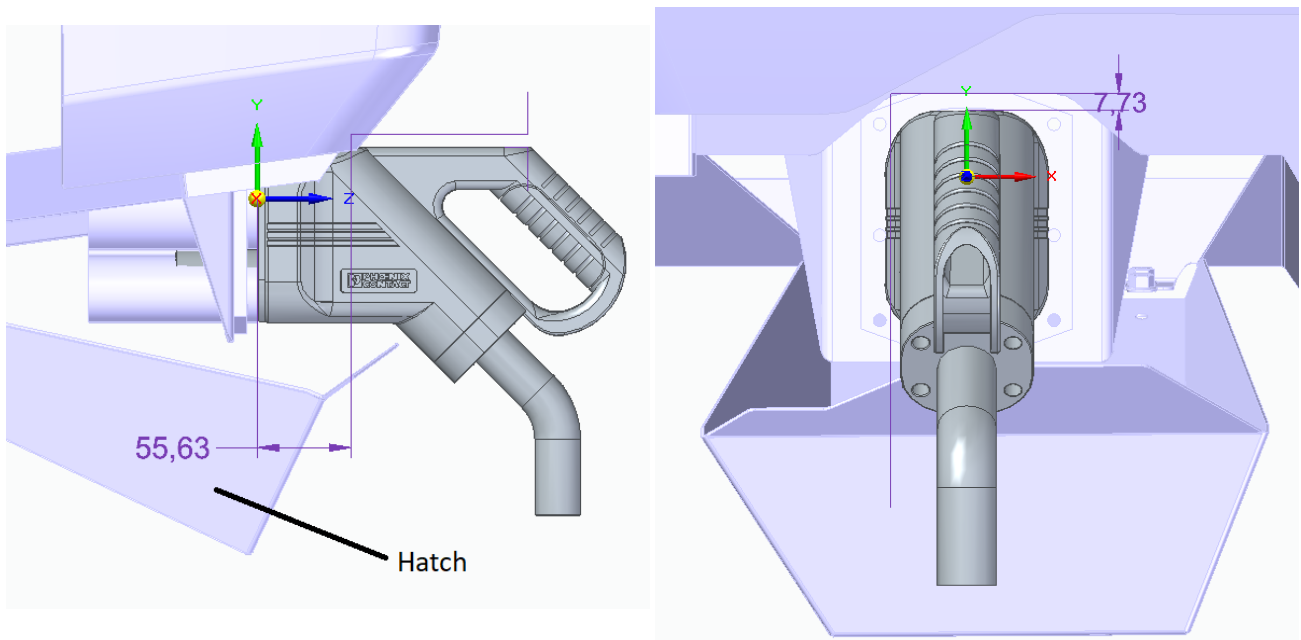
Left: Side view of the port and handle assembly. Right: Behind view of port and handle
